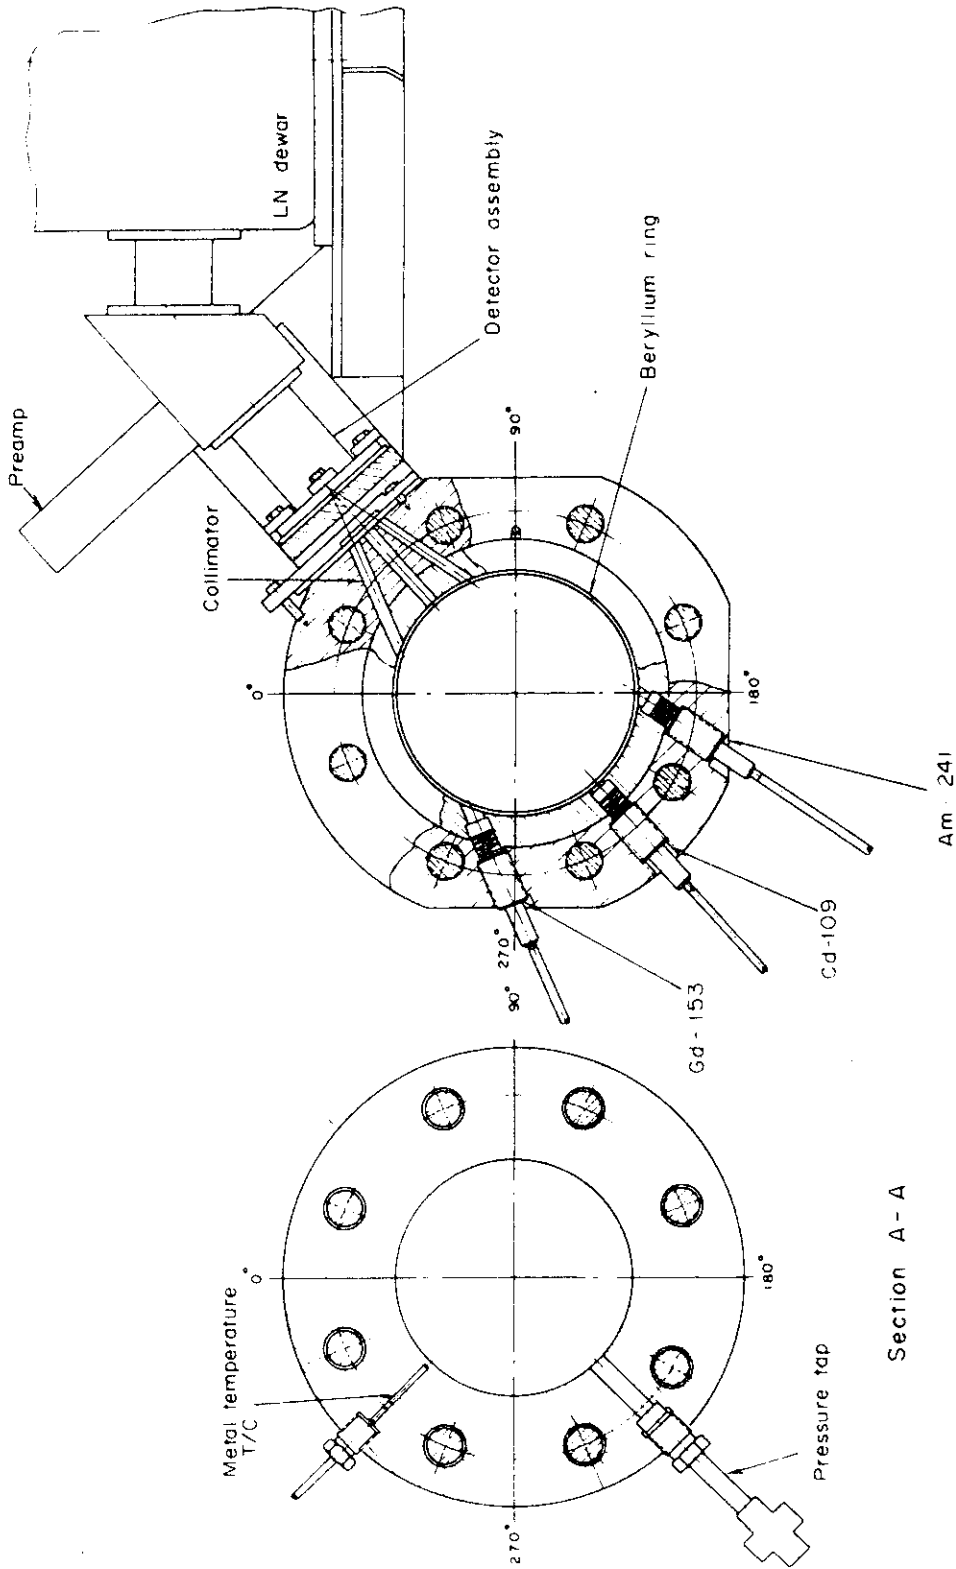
Cross section of cold leg spool piece (3-beam γ -densitometer, metal temperature thermocouple and pressure transducer)
